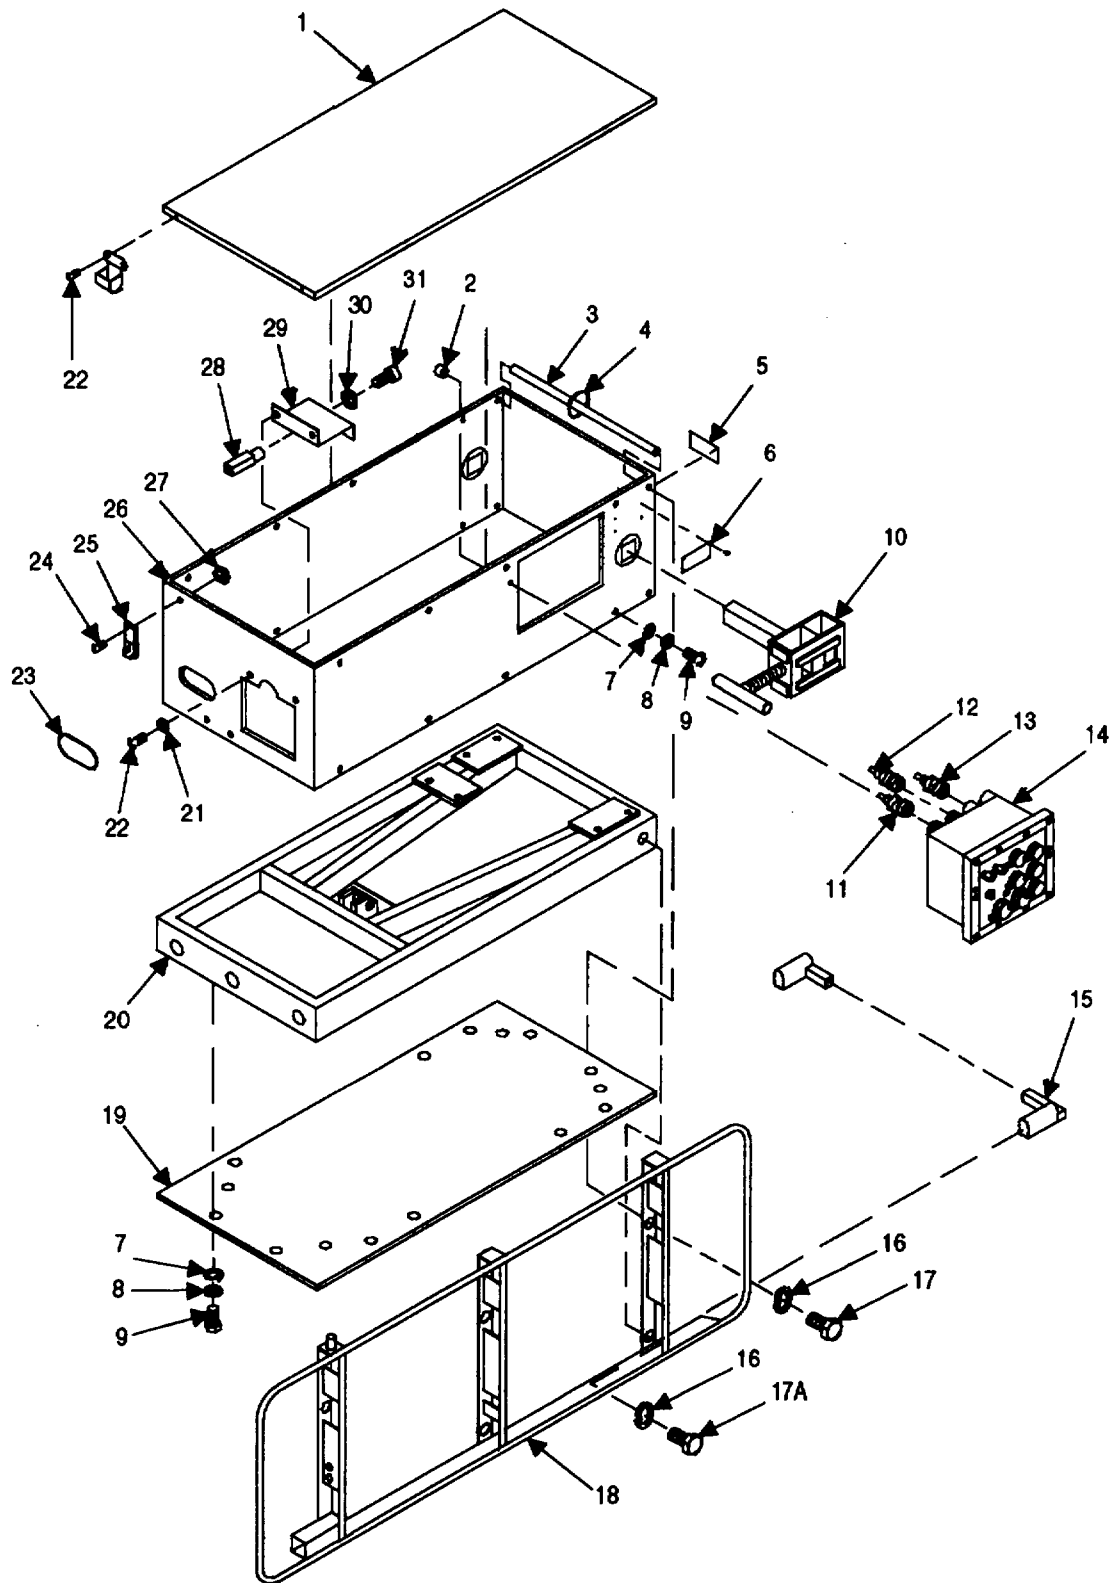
Tank Target Assembly 11784502-1 and 11784502-2 (Sheet 1 of 2)
